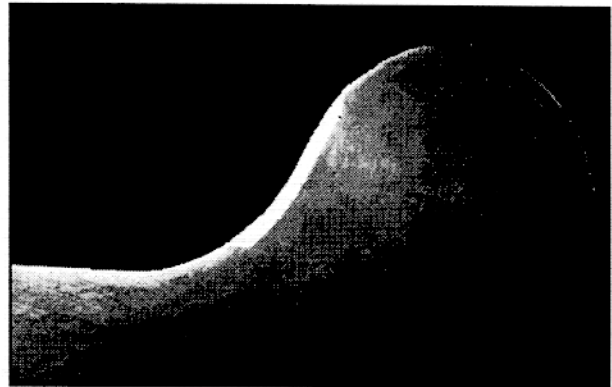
Section through a Clad Wheel, Showing a 0.08-Inch-Thick Cobalt Alloy Layer at the Wheel Flange
